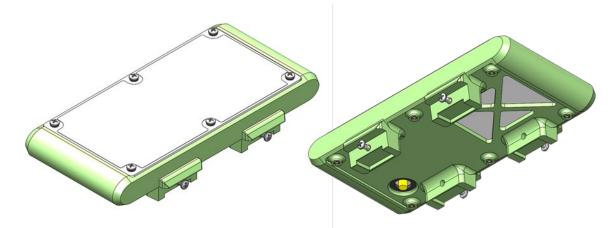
Example MP-compliant 4-pt Antenna Adaptor Assembly
